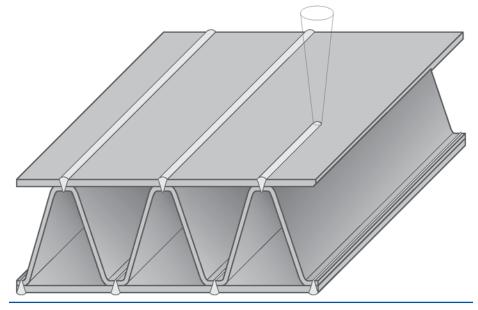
Schematic of a LASCOR panel showing a laser beam being used to join the cover sheet to the core.
